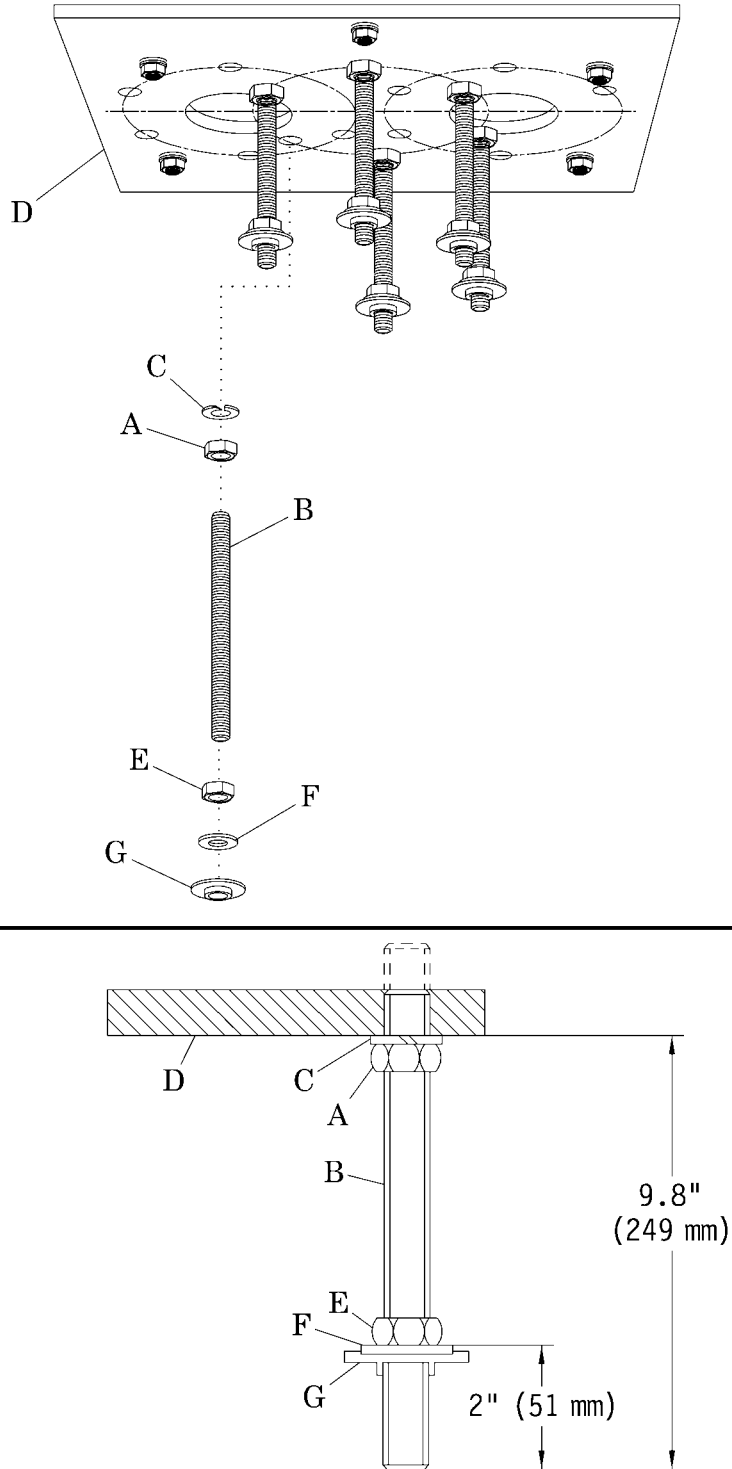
Single Mount Ceiling Arm Threaded Rod Installation
